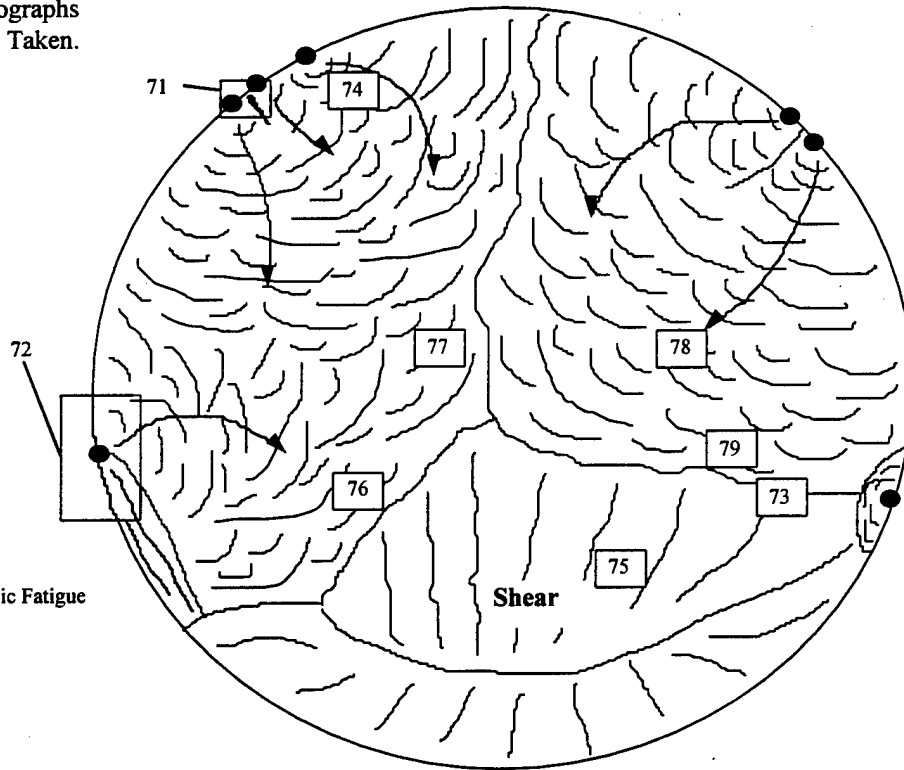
Schematic of the Fracture Surface of SIK Tie Rod -00973.
